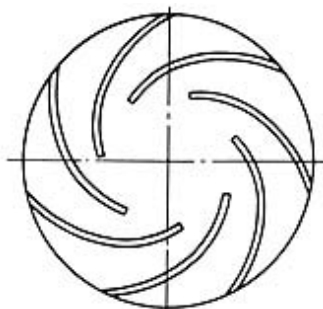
Radial impeller with blades extending into the suction mouth (front view with front coverplate removed)
